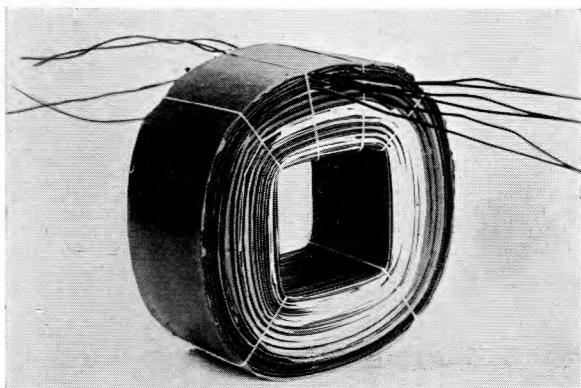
A 200-250-VOLT PRIMARY WINDING AFTER REMOVAL FROM THE FORMER.
